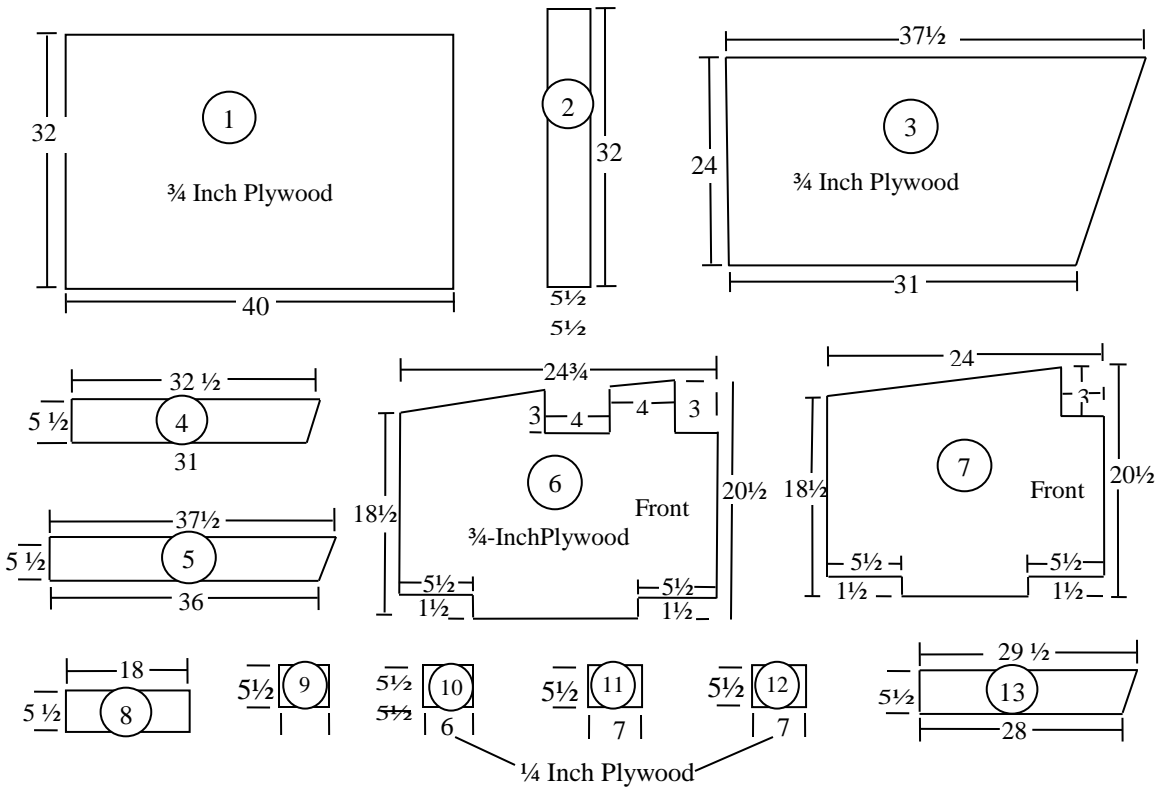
Materials Needed for Engine Mount, Elevator Supports
